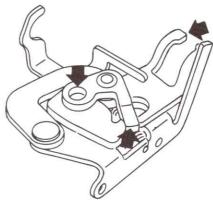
Reverse bracket assembly wear points (Sec 7)
